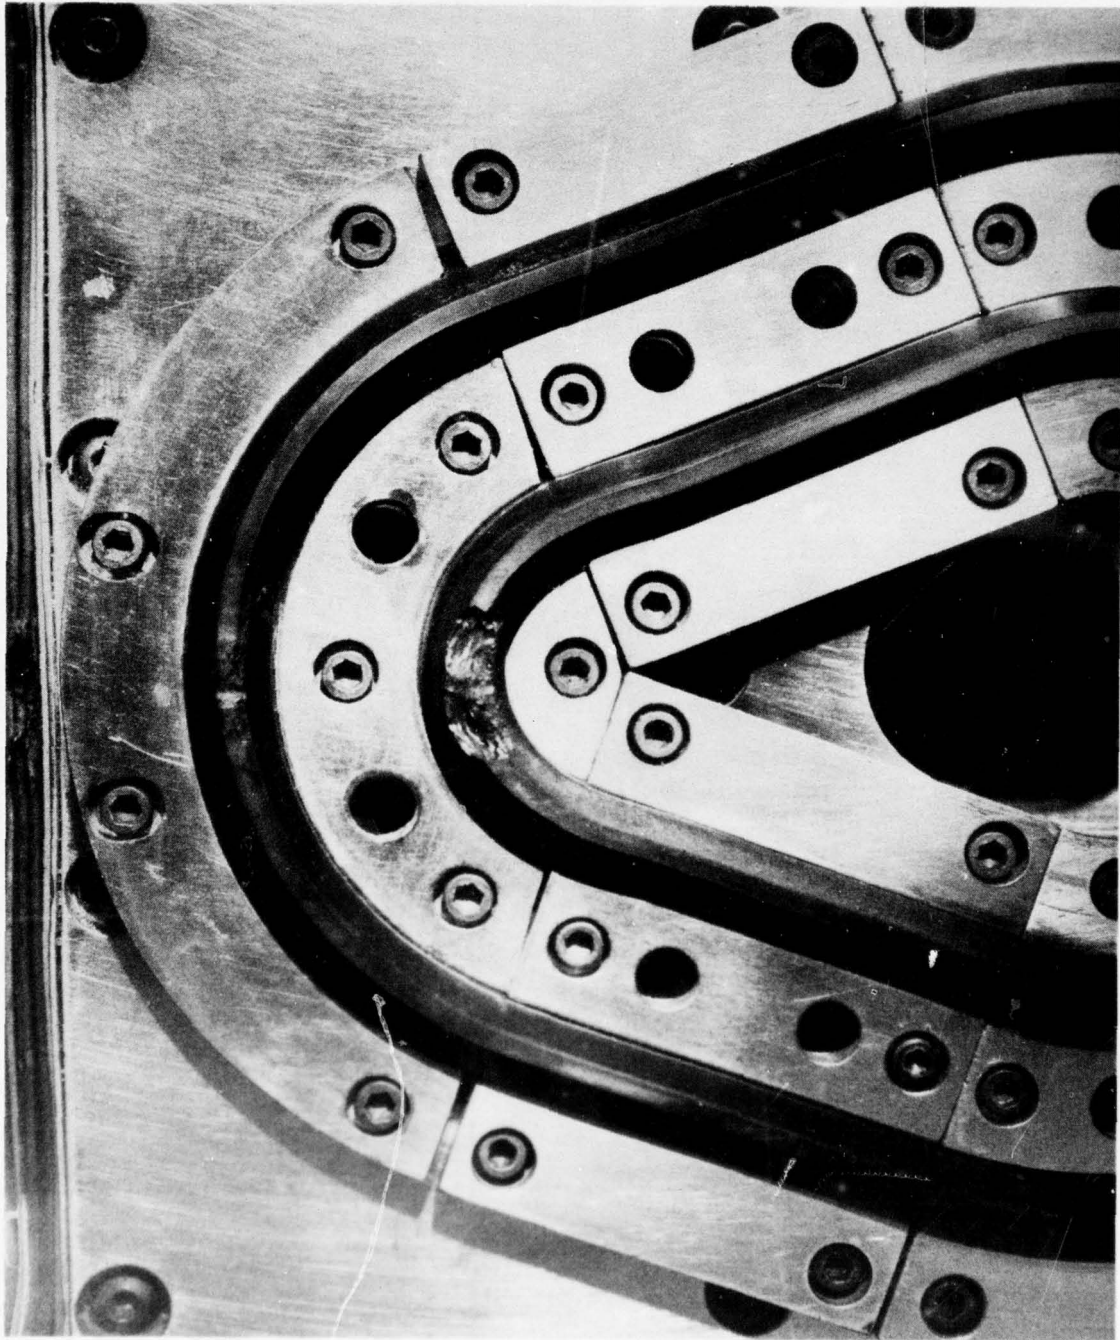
Sliding Seal Set No. 6 - Wear Caused by Repeated
